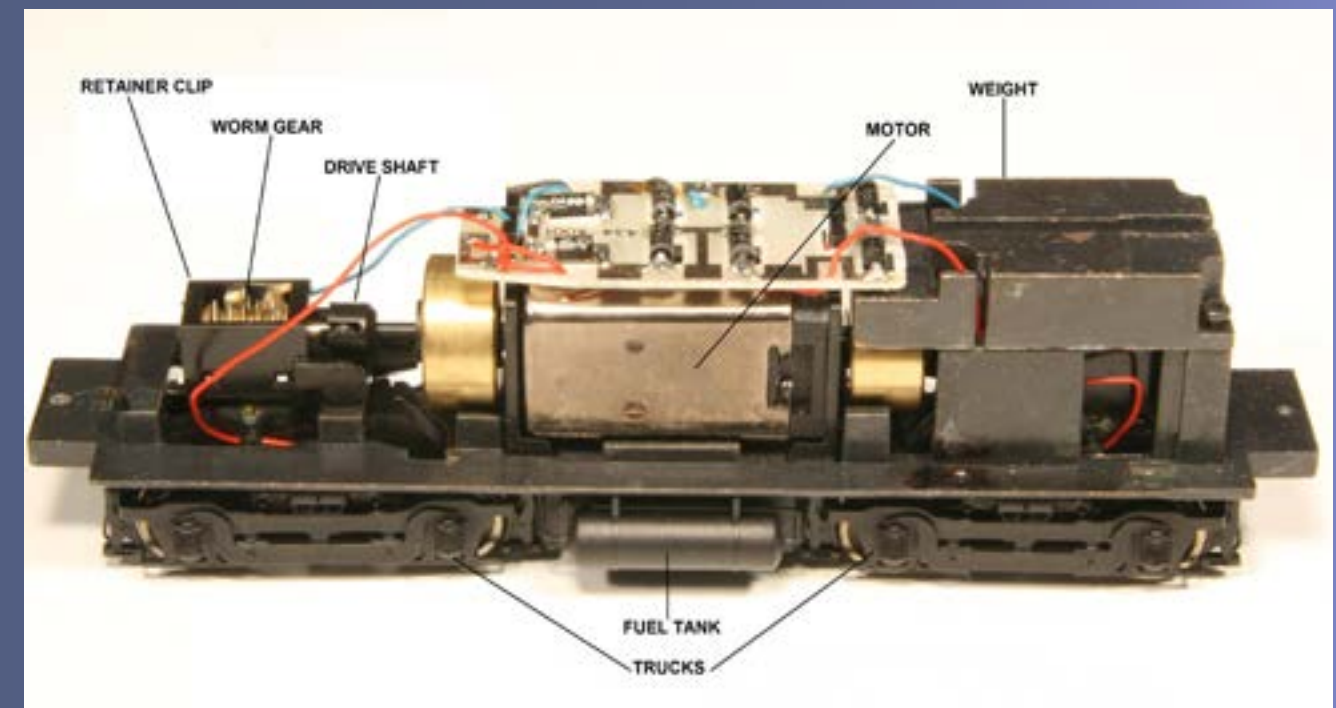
The drivetrain of a model locomotive is comprised of several basic parts including a motor with flywheels, driveshafts, and gears.
